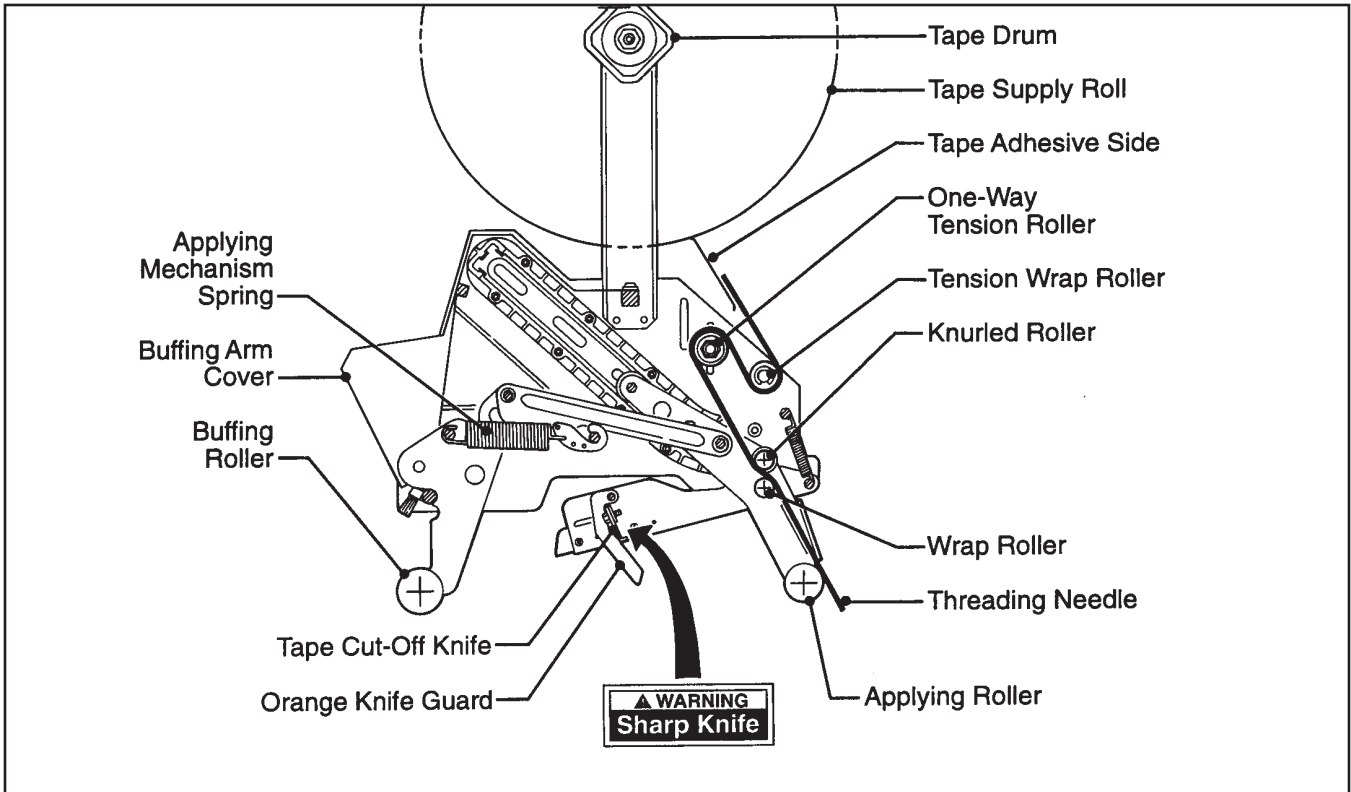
Taping Head Components/Threading Diagram - Upper Head (Left Side View)
